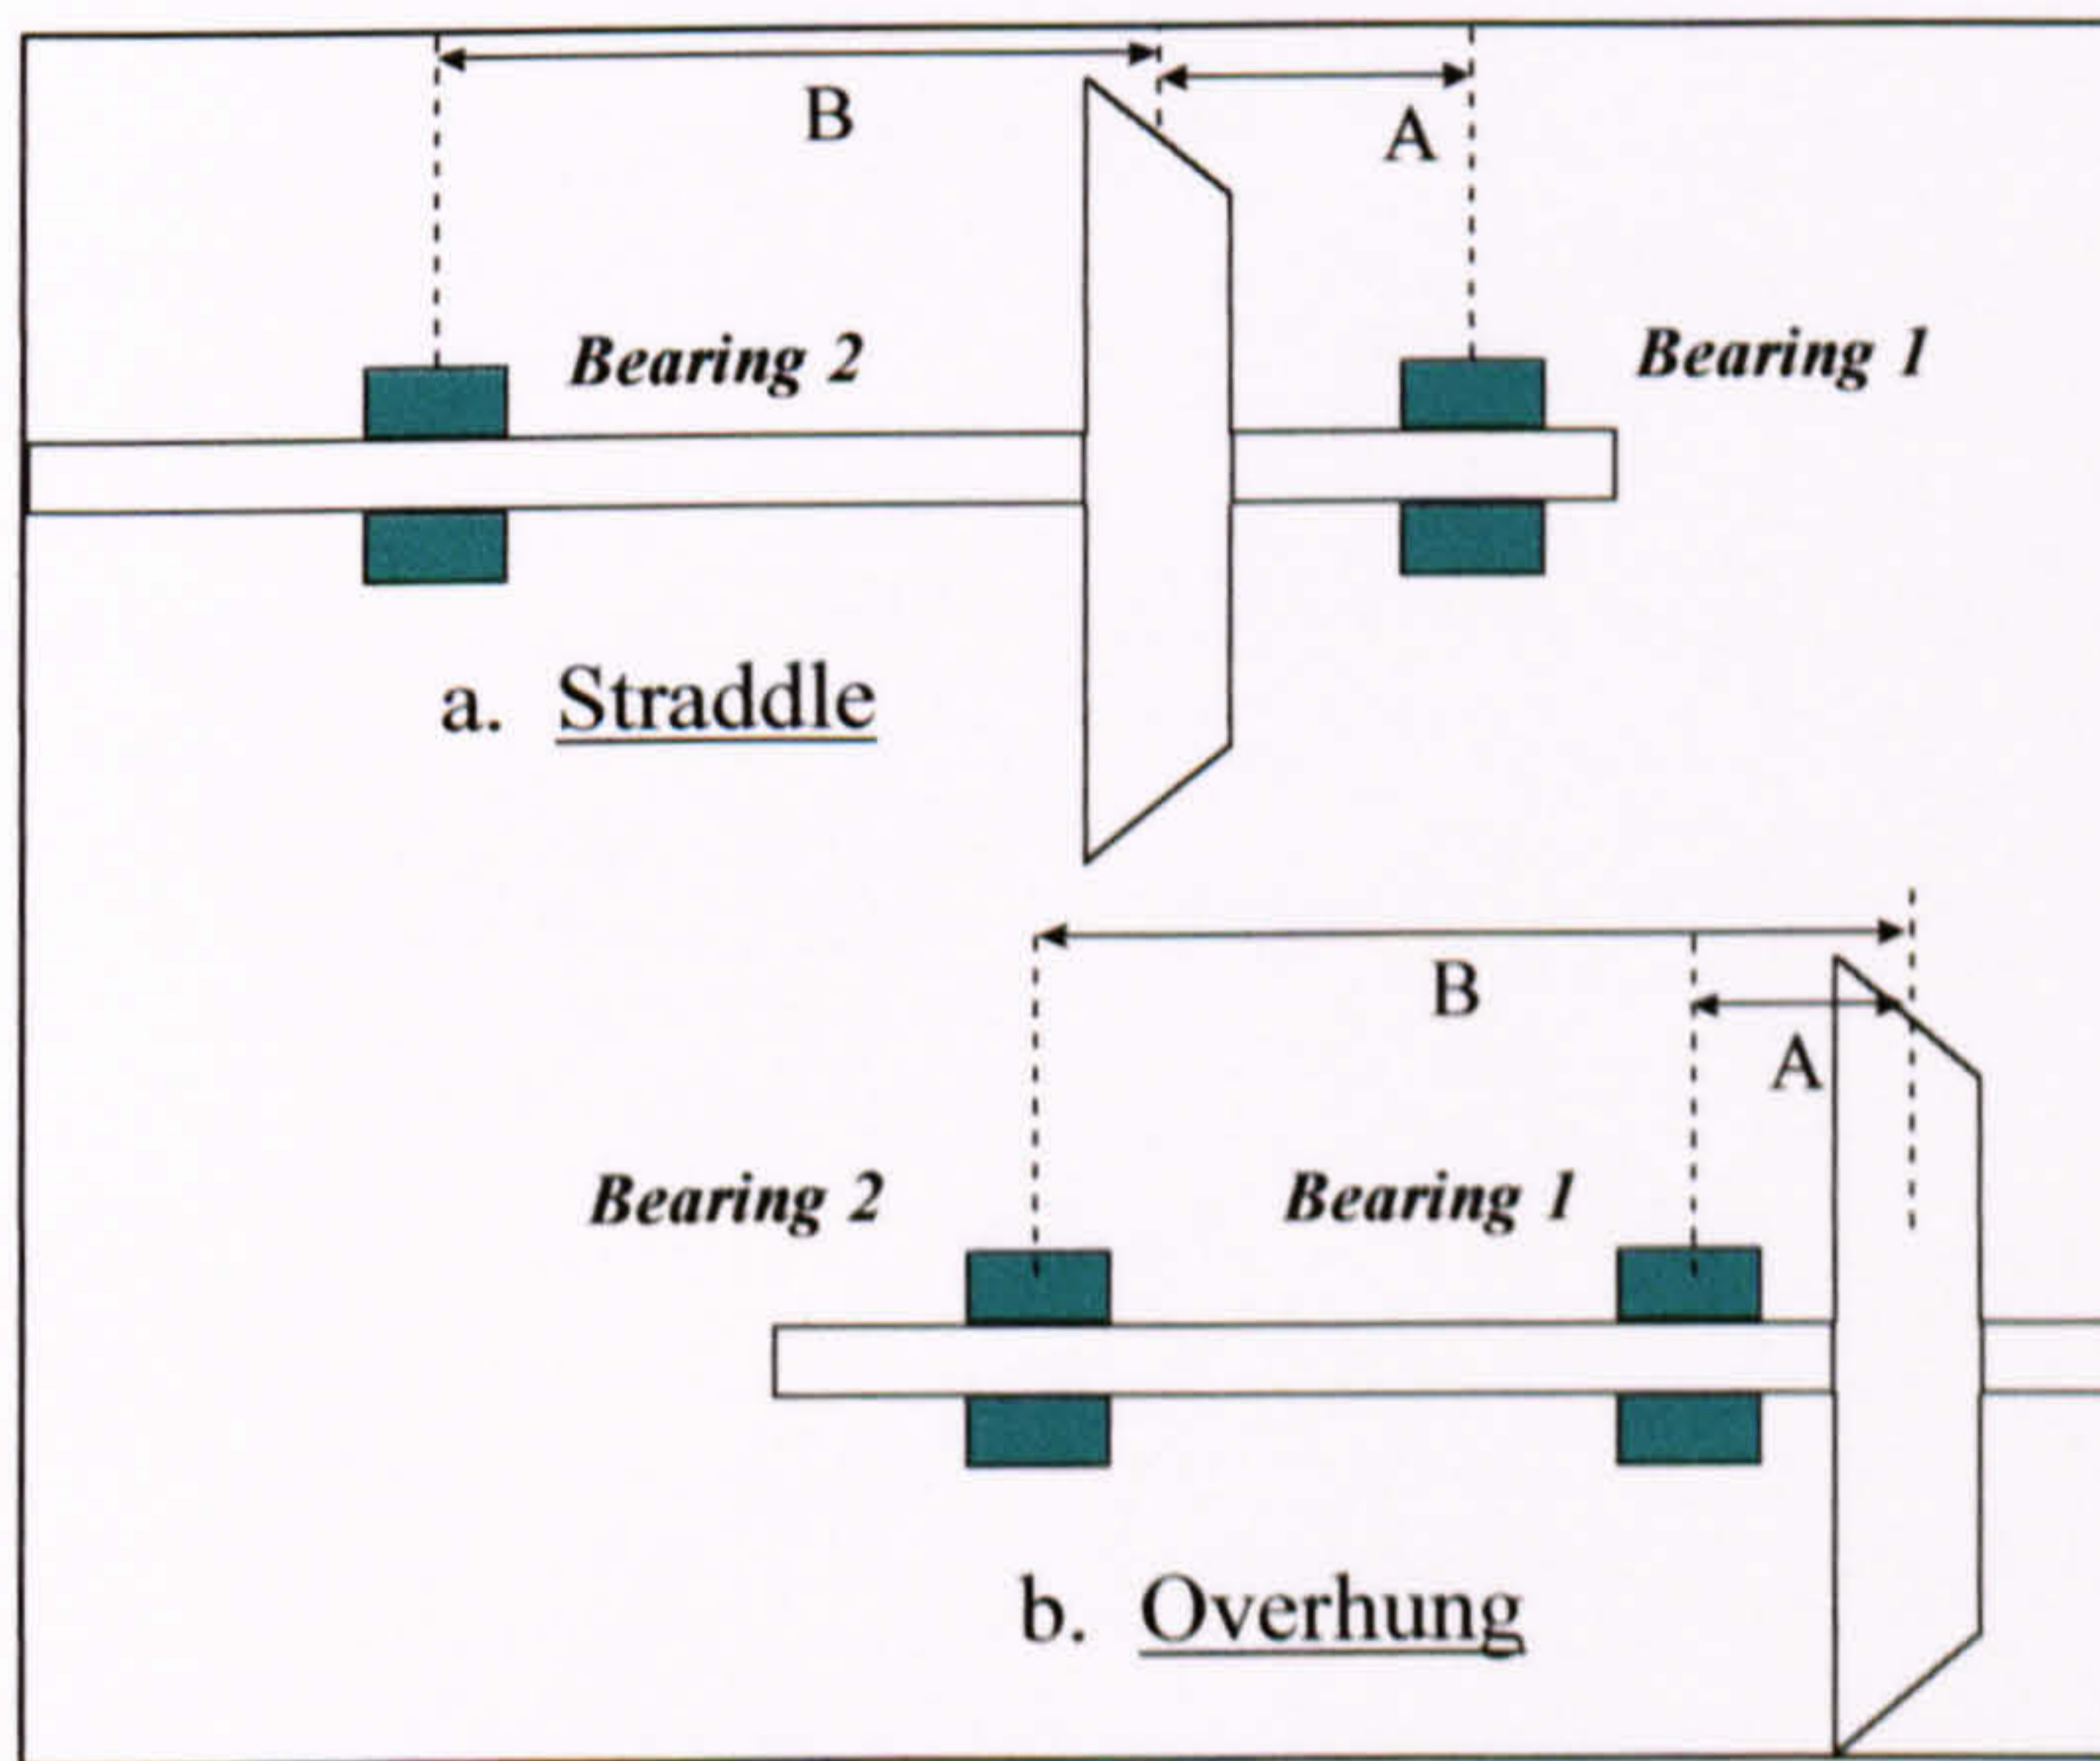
Two configurations of bearing and shaft assembly [Savage and Brikmanis, 1986]
